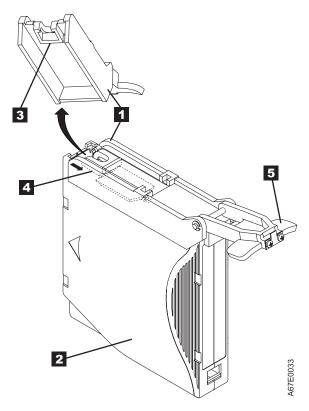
Attaching the leader pin attach tool to the cartridge. To hold the cartridge door open, hook the tool into the door and pull the tool back.
